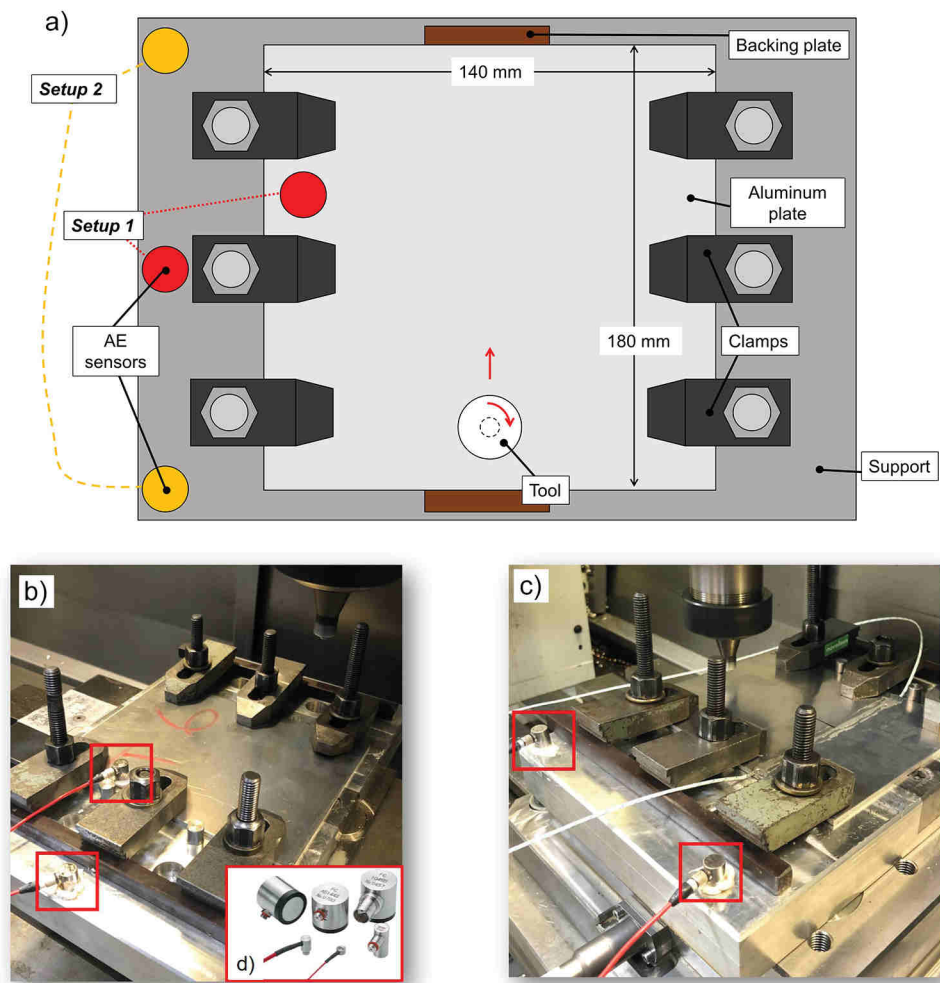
View of the FSW experimental devices: a) sketch system, experimental configuration b) setup 1 and c) setup 2, d) AE sensors.
